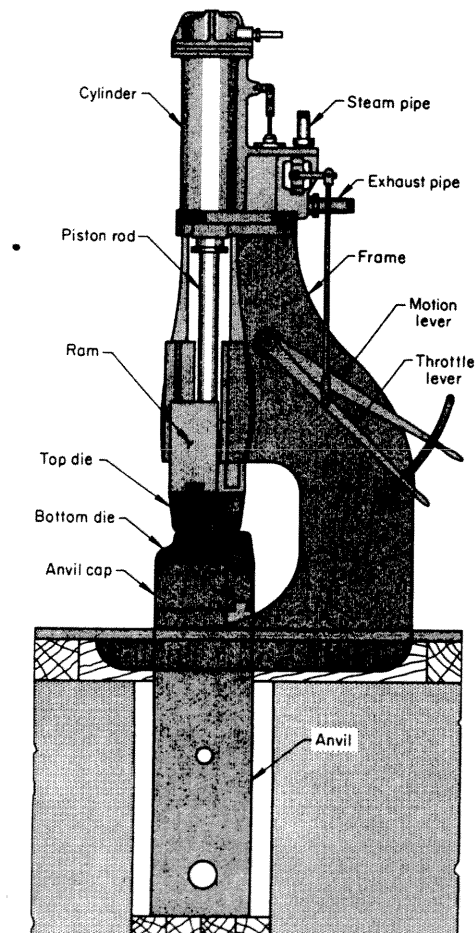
Single Frame Power Hammer used for Open-Die Forging
